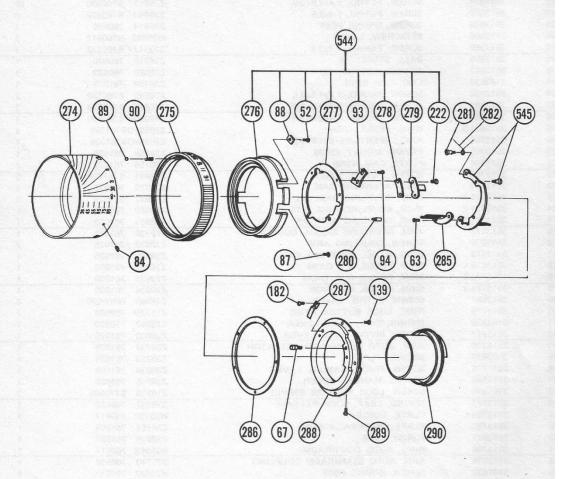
Pentax K Mount Assembly, Complete (Ref 547, Pg 55)
